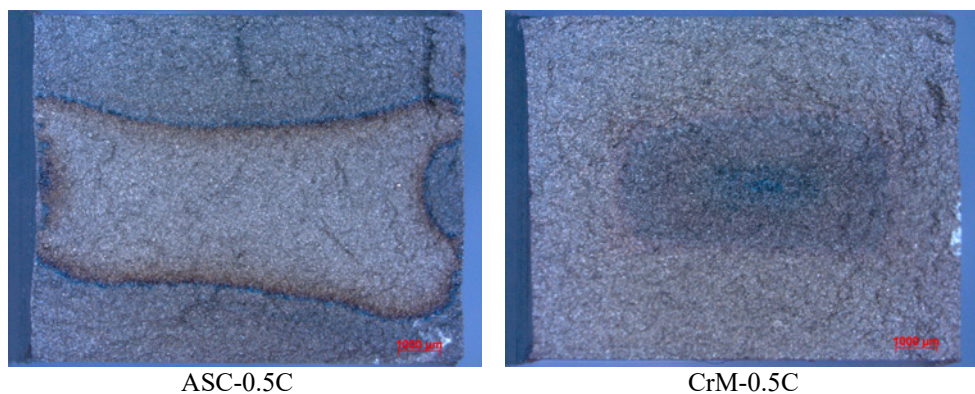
Fracture surfaces of samples after oxidizing treatment at 400°C for 60 min in air; macroscopic images.
